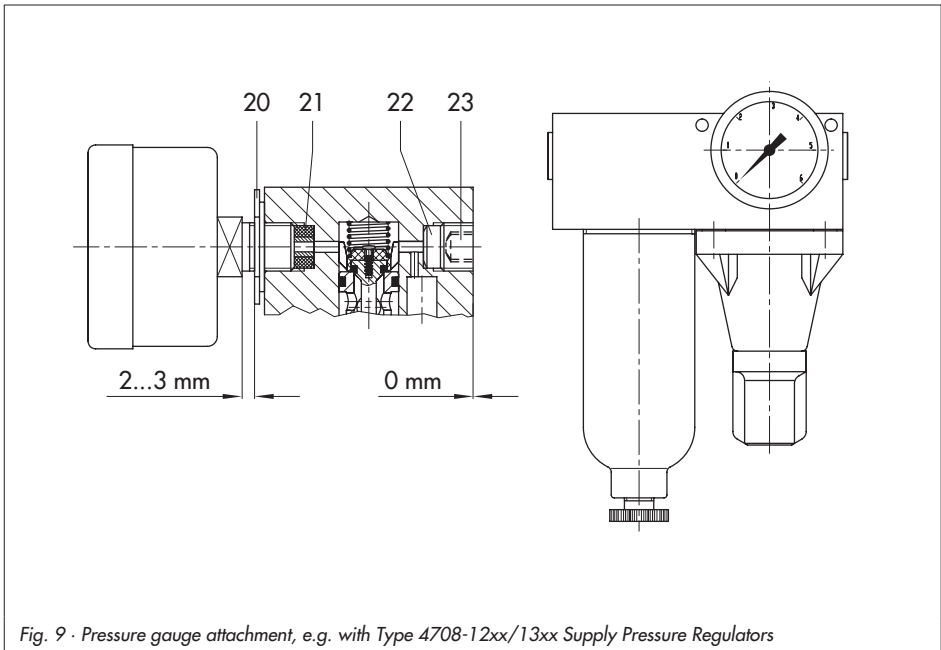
· Pressure gauge attachment, e.g. with Type 4708-12xx/13xx Supply Pressure Regulators
